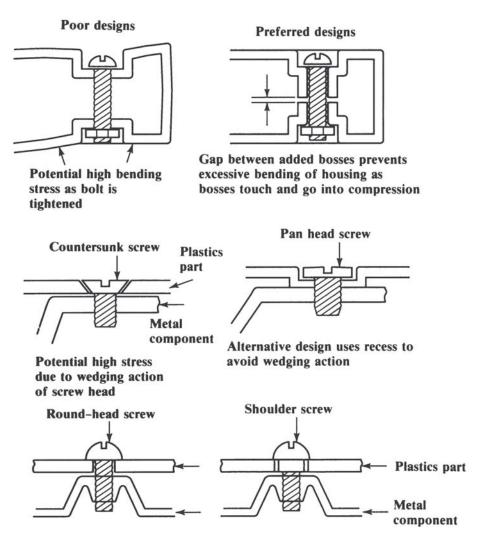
Examples of bad and good designs in assembling plastics with metal fasteners
